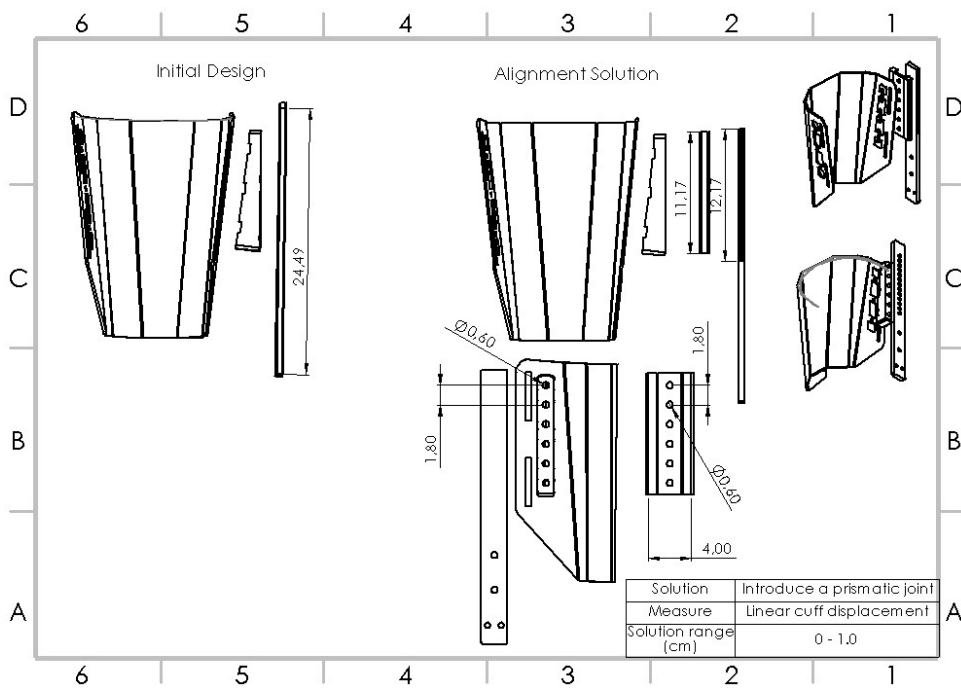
Technical drawing of the initial and final designs for the solution "Introduce a prismatic joint".
